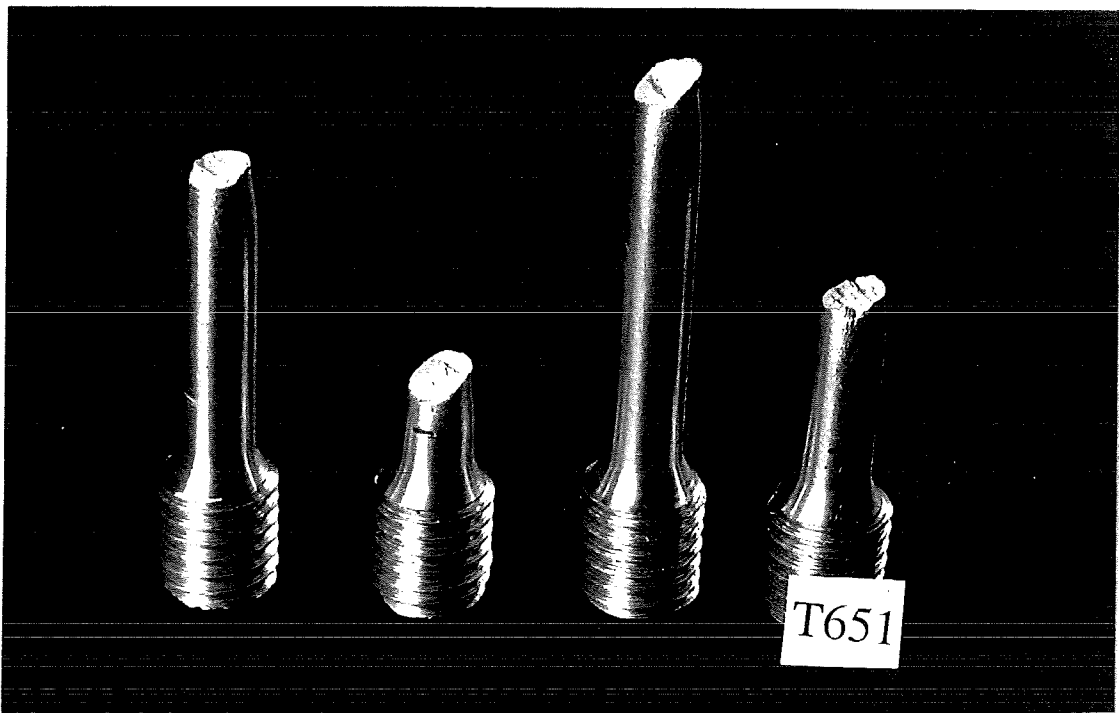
Fractured AA6061 tensile specimens in T651 condition
